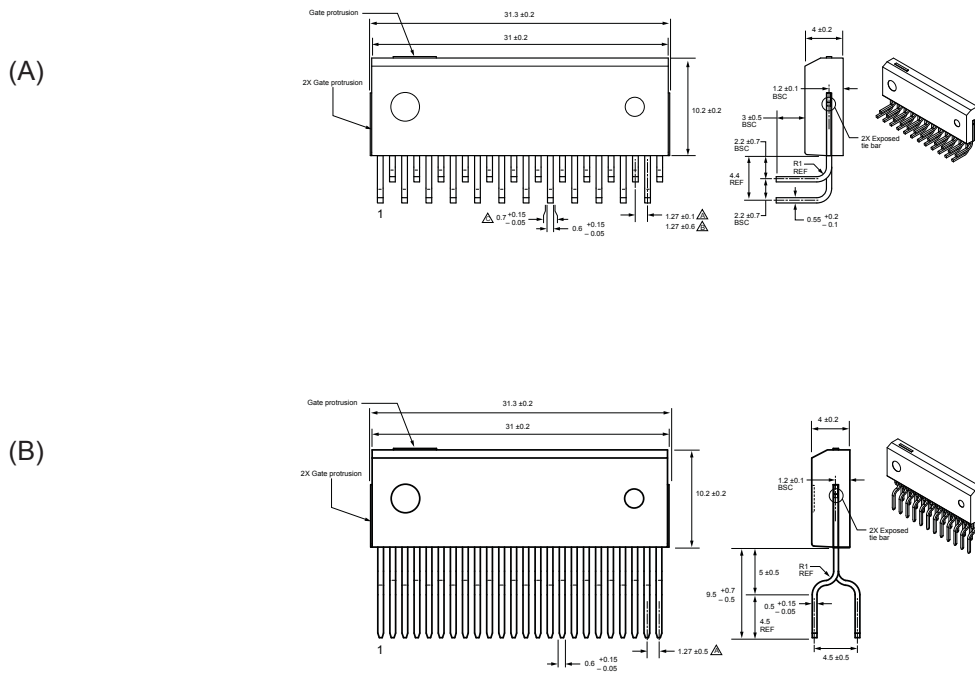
Package Outline Drawings. (A) LF2451, L-bend horizontal mount, (B) LF2452, vertical mount.
